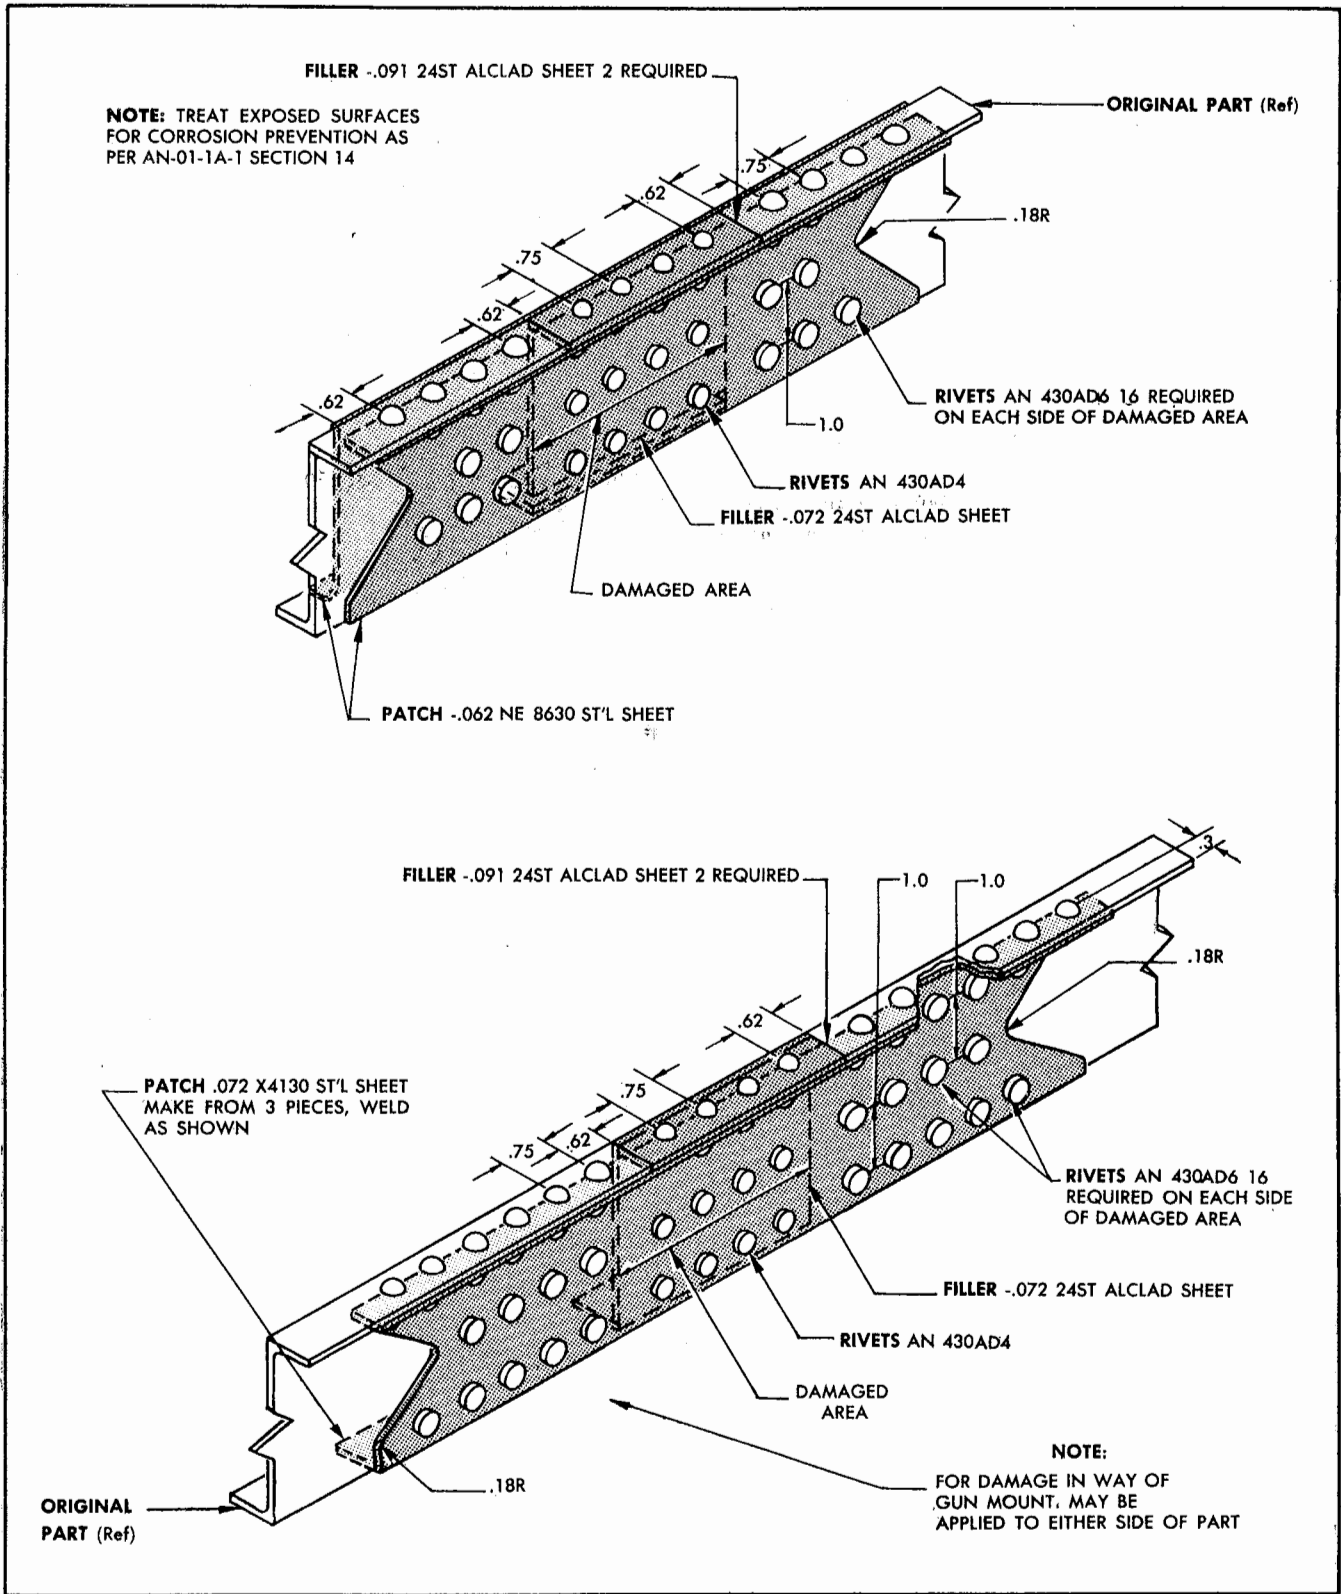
Extruded "Z" Section Repair — Armament Compartment
